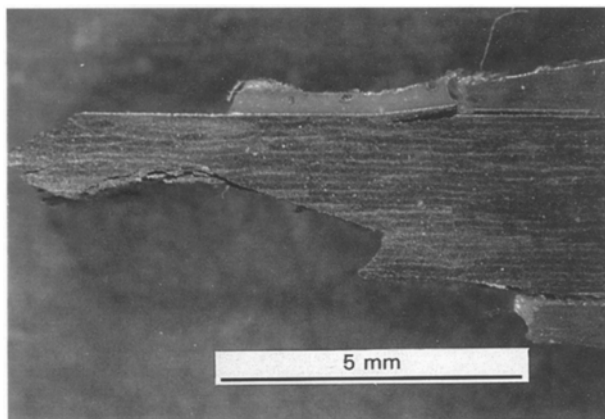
Typical premature compressive fracture by buckling (side view) of a T300/914 Celanese transverse compressive test specimen of gauge length 12.7 mm (temperature = 23° C , test rate = $10^\circ \text{ mm min}^{-1}$).
